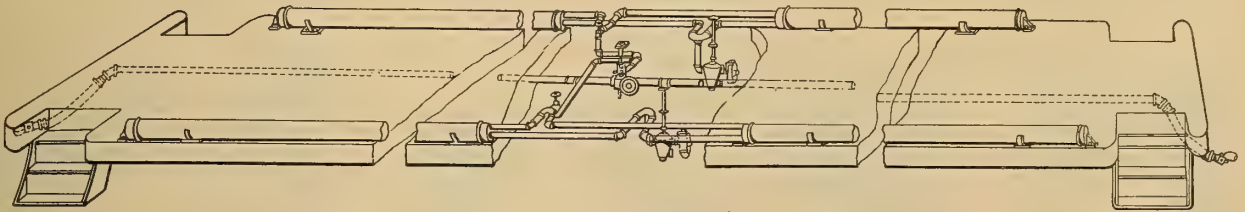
PLAN OF CAR SHOWING SYSTEM OF PIPING.
